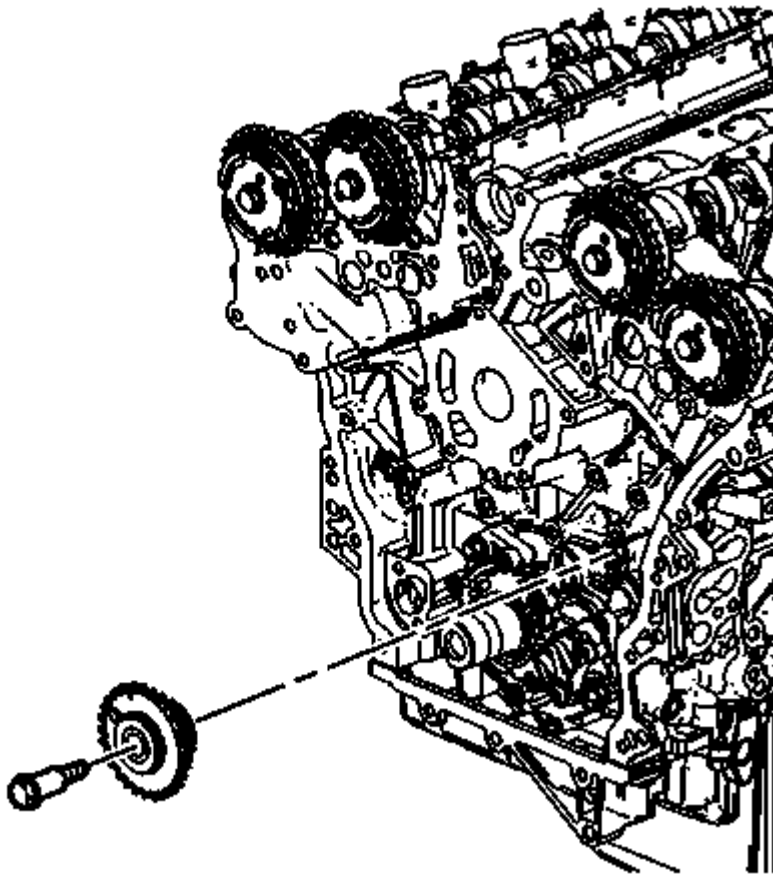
View Of Camshaft Intermediate Drive Chain Idler
